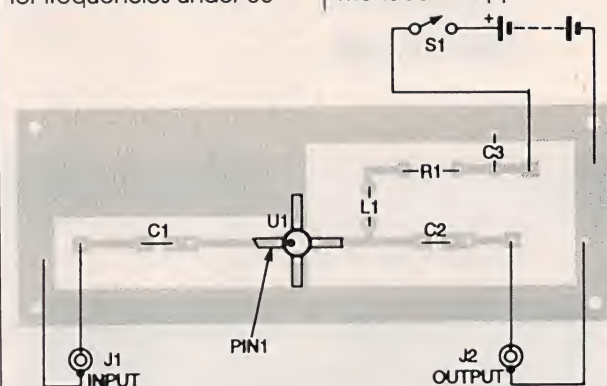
This is a parts-placement diagram for the Fig. 3 printed-circuit template. (See text for assembly options).
